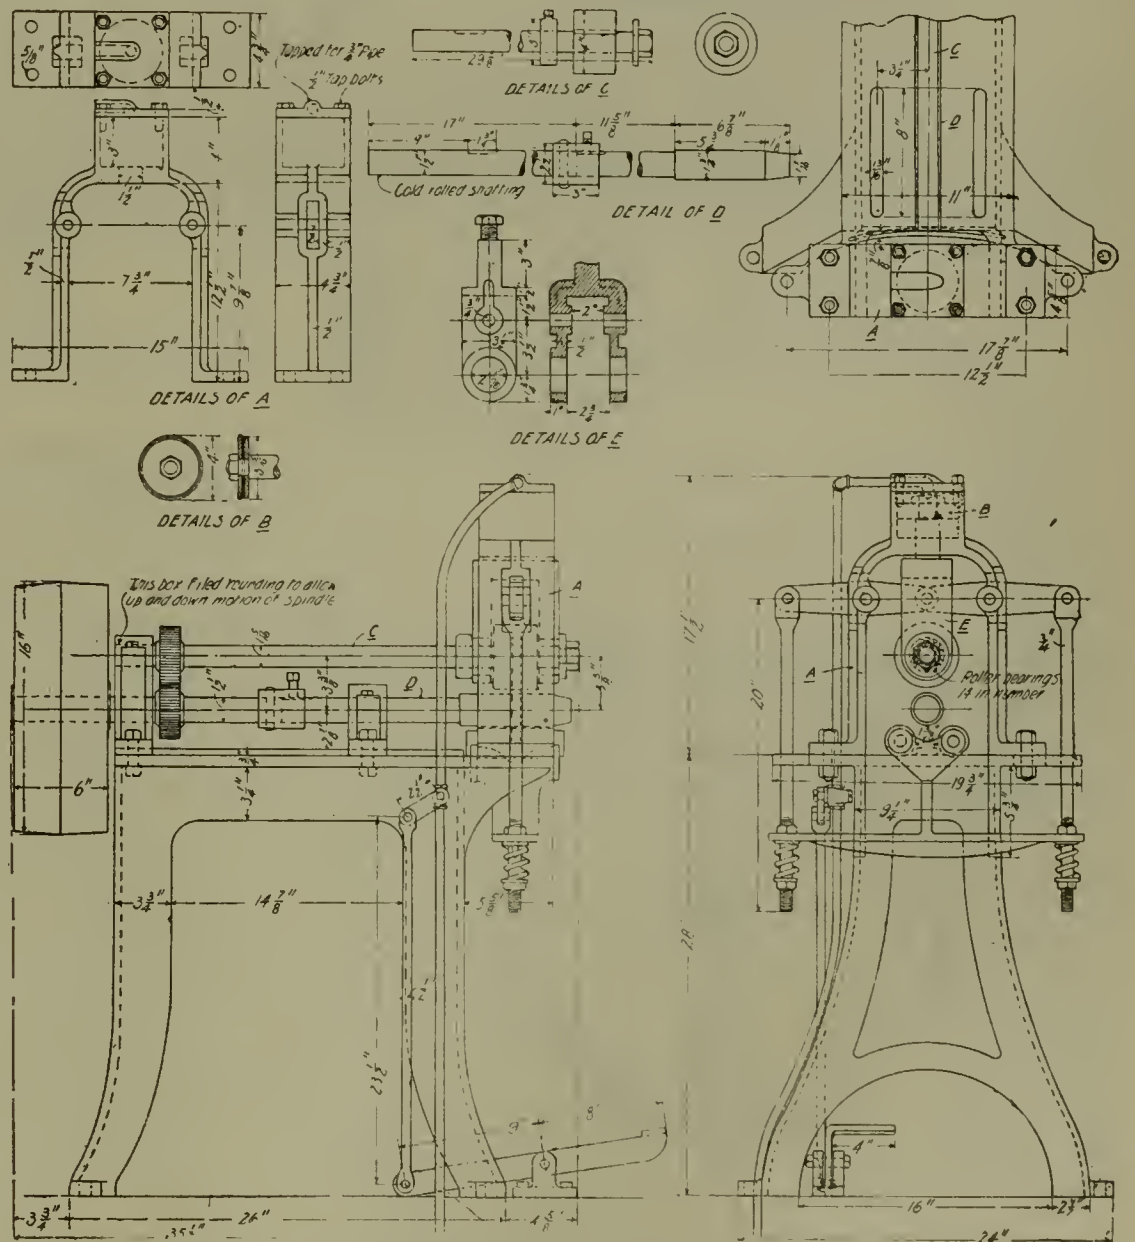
FERGUSON FLUE WELDING MACHINE.
